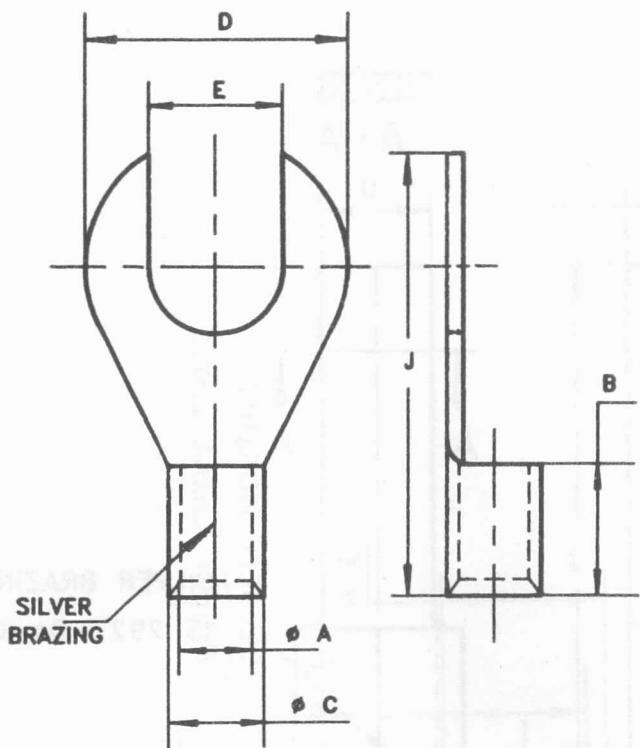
COPPER RING TONGUE FORK TYPE TERMINAL END FOR SOLDERLESS CRIMPING TO COPPER/ ALUMINIUM CONDUCTORS
